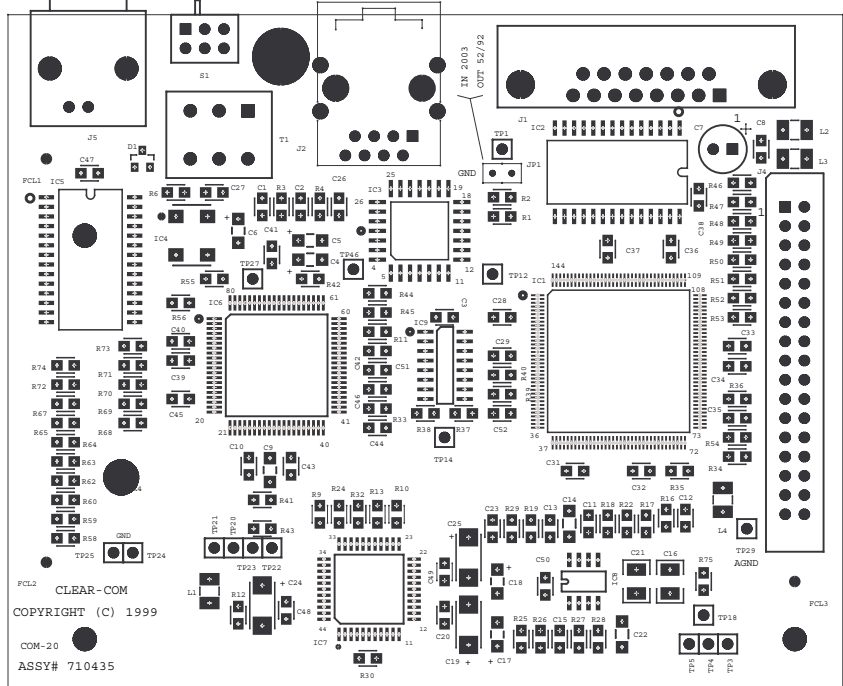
Assembly Drawing—COM-20 Communication PCB Rev. A
